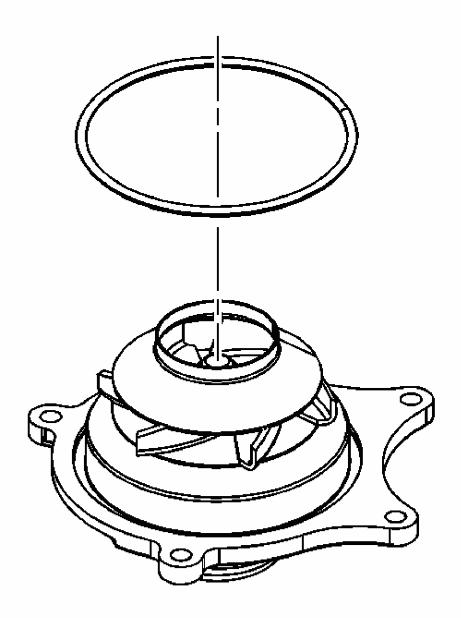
Identifying Water Pump O-Ring Seal Courtesy of GENERAL MOTORS CORP.
